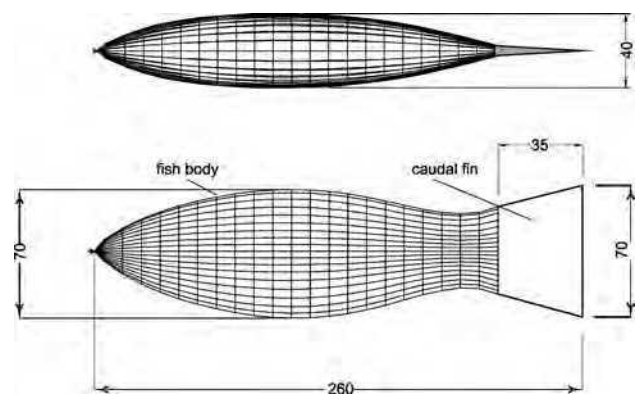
Dimensions of the mechanical fish in millimeters. *Upper graph top view. Lower graph side view
